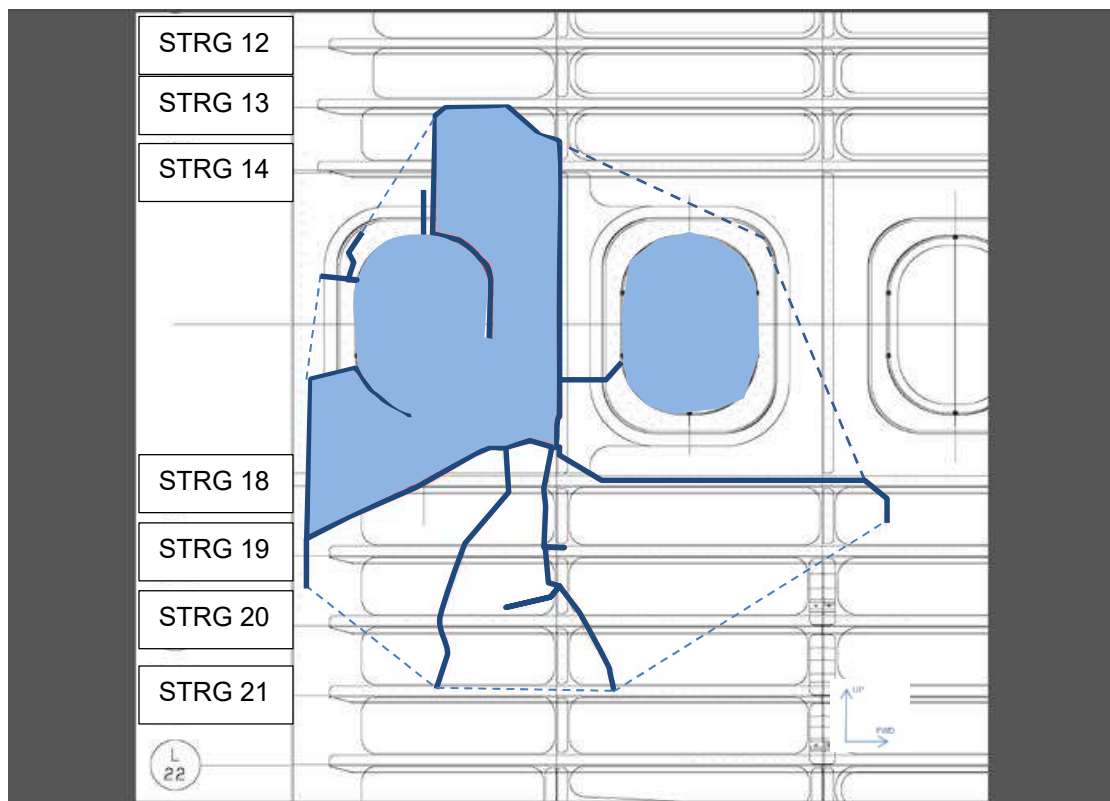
Skin rupture & bending sketch - missing parts (light blue)
